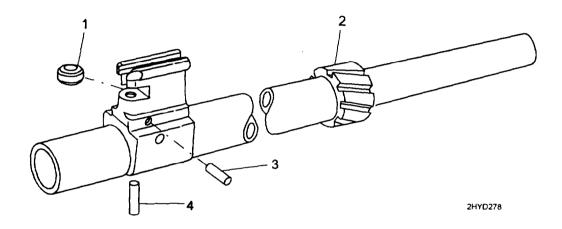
Group 04 Operating Rod Assembly, PN 9362510
